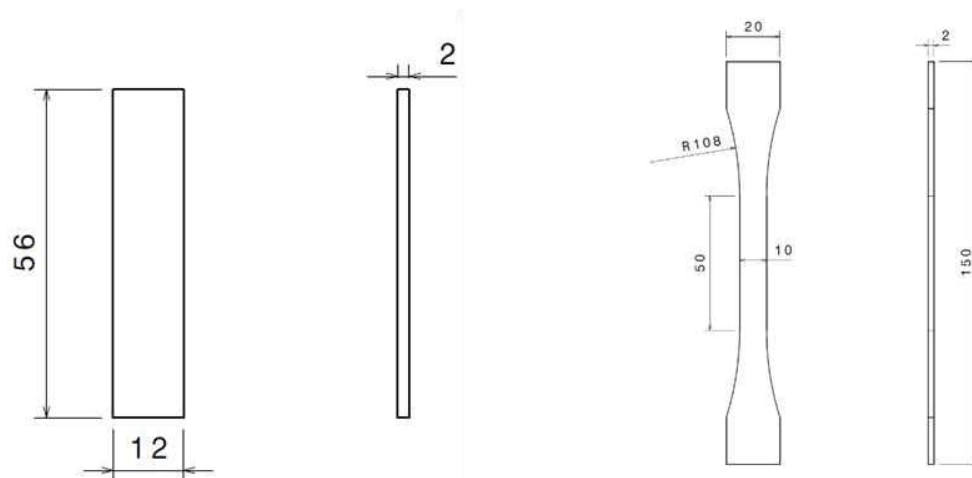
Sample shape and dimension for (Left) DMA and (Right) tensile testing
